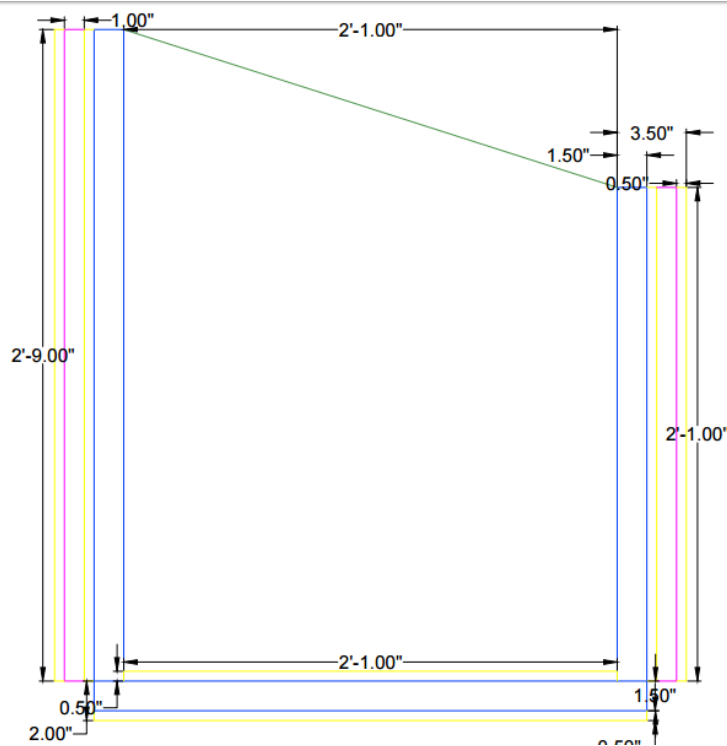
A side view of the upper cabinet that includes thickness, length and height dimensions
